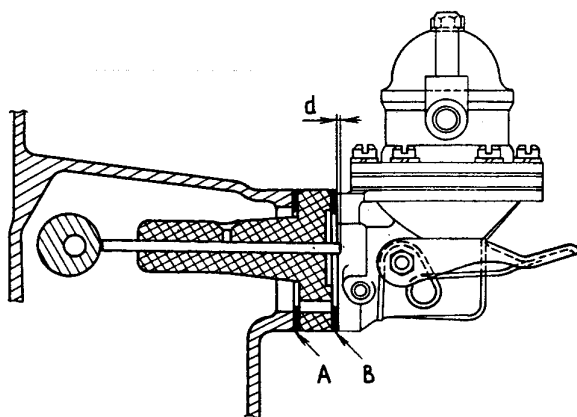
Diagram for Checking and Adjusting Travel of Pump Drive Pushrod:
